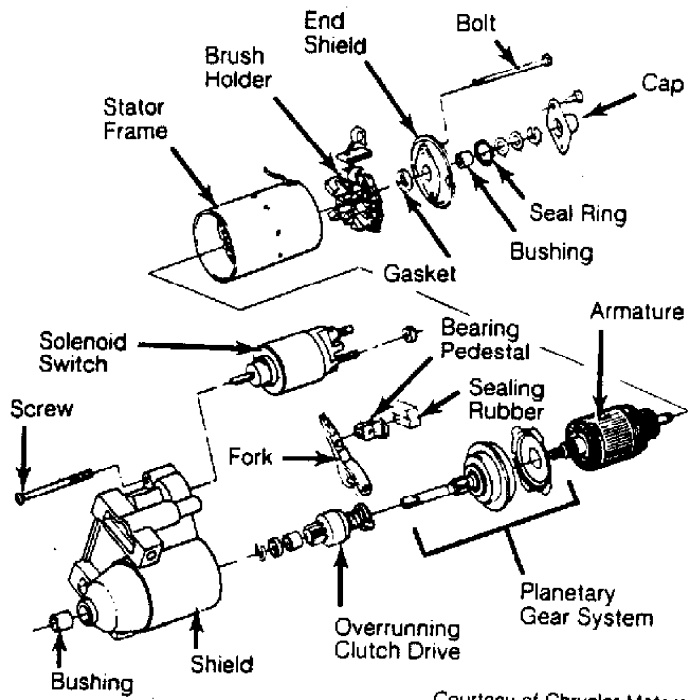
Exploded View Of Mitsubishi Starter (4.0L)
